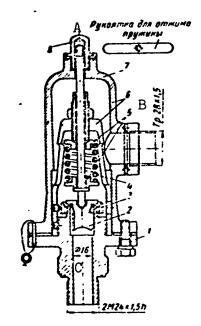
Safety valve: 1) seat; 2) valve; 3) socket; 4) spring; 5) plates; 6) shell; 7) cap; 8) cap screw. A) Handle for releasing spring; B) Tr; C) diameter.
